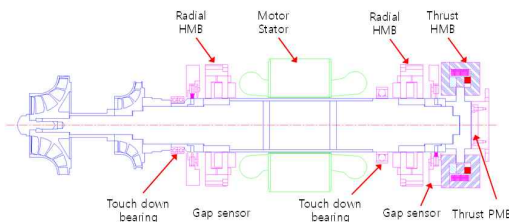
Configuration of rotor and magnet bearings of 200RT class turbo refrigerant compressor
